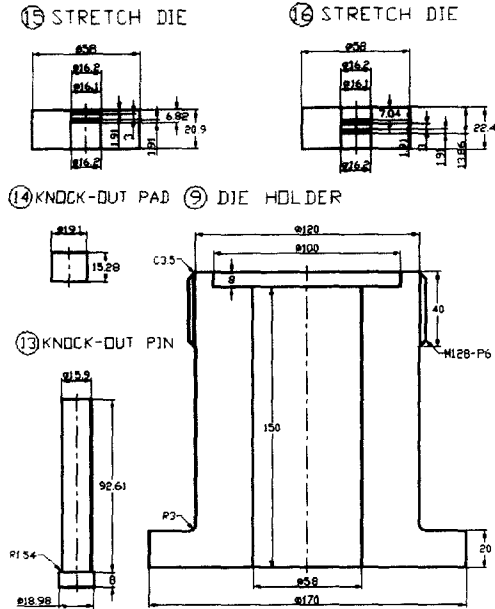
(b) Details of die components for forward extrusion die(lower parts of a die)
